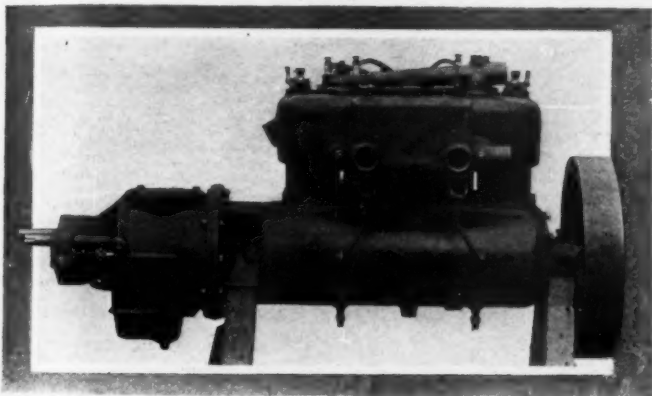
Right side of the motor, showing flywheel in front, and lubricating oil tank which is warmed by exhaust heat
